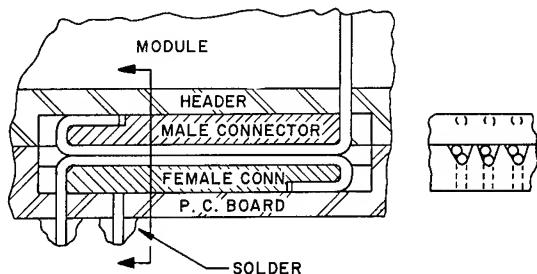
Detail of Design No. 1 when mated. Note wire-to-wire contact in right section.
